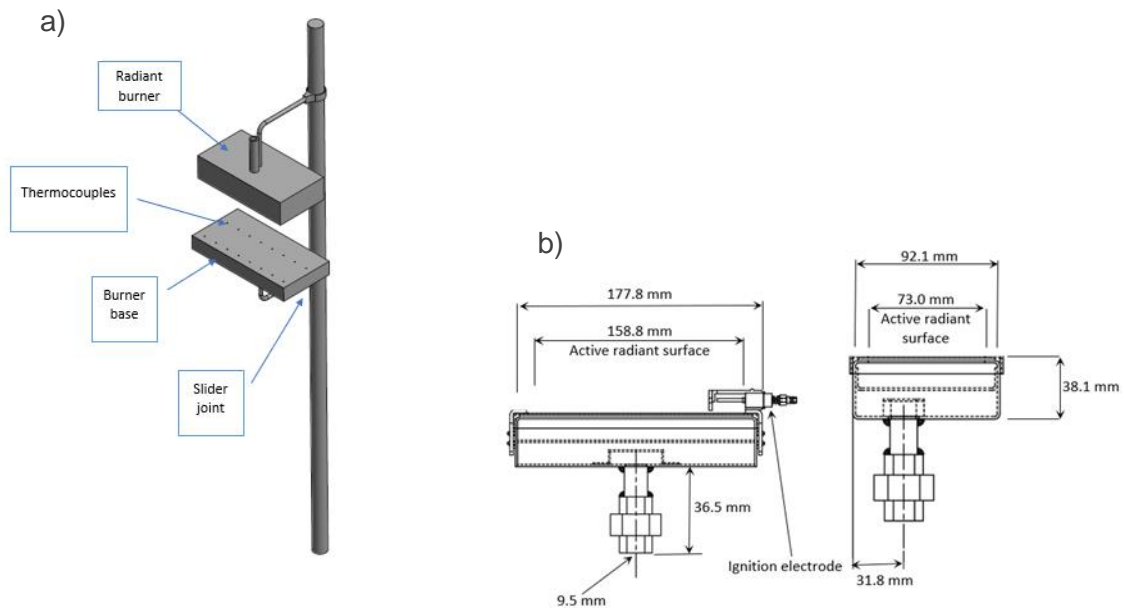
a) Isometric view of the radiant burner and b) 2-D drawing of the radiant burner.
